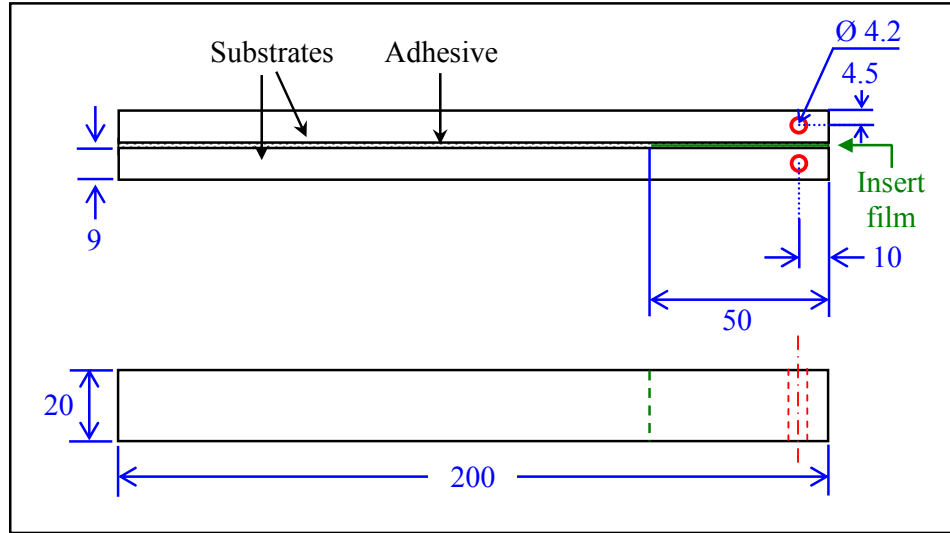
DCB test coupon geometry for aluminium alloy substrates (dimensions in mm)
